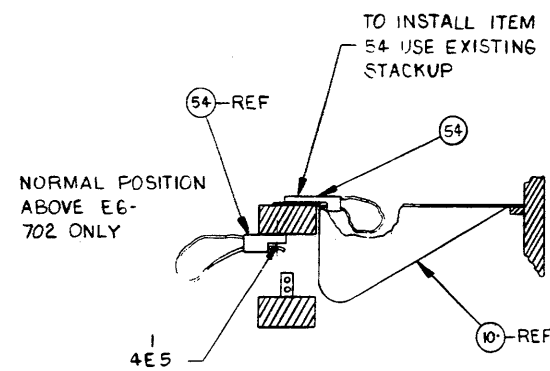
Logic and Option Drawer Assembly (D70030064, Rev Z, Sheet 1 of 4)
